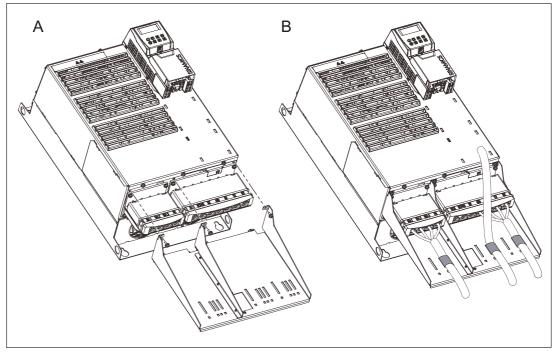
Mounting a Screening Kit on a Power Module of frame sizes FSD and FSE
